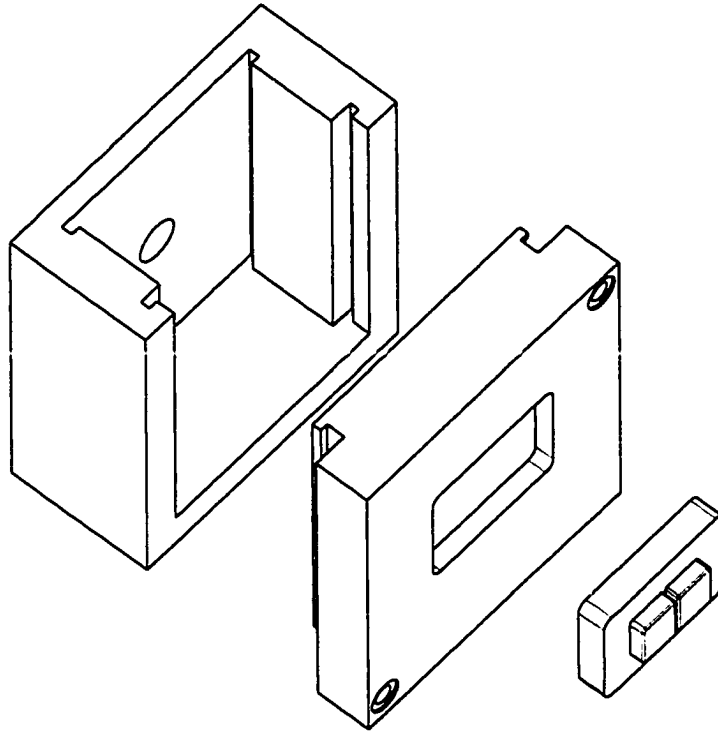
Components of the rear half: U-frame (clamping plate and spacer blocks), plate B and core insert.
